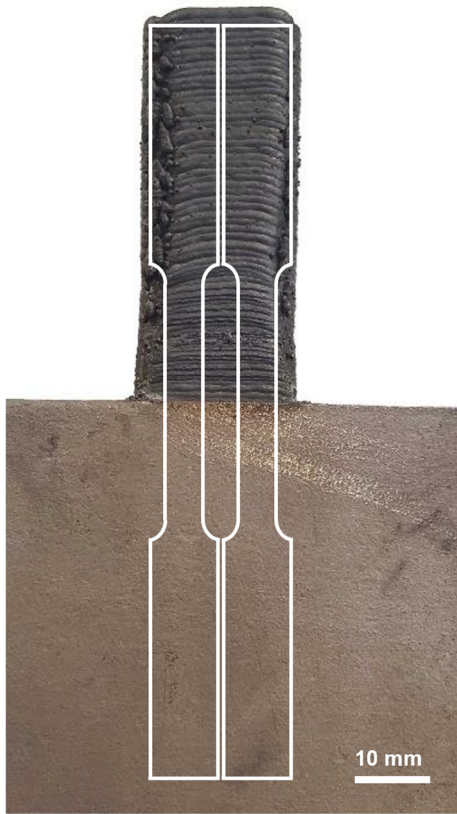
IN625 tensile specimen column and SS304L build plate with the tensile specimens outlined.
